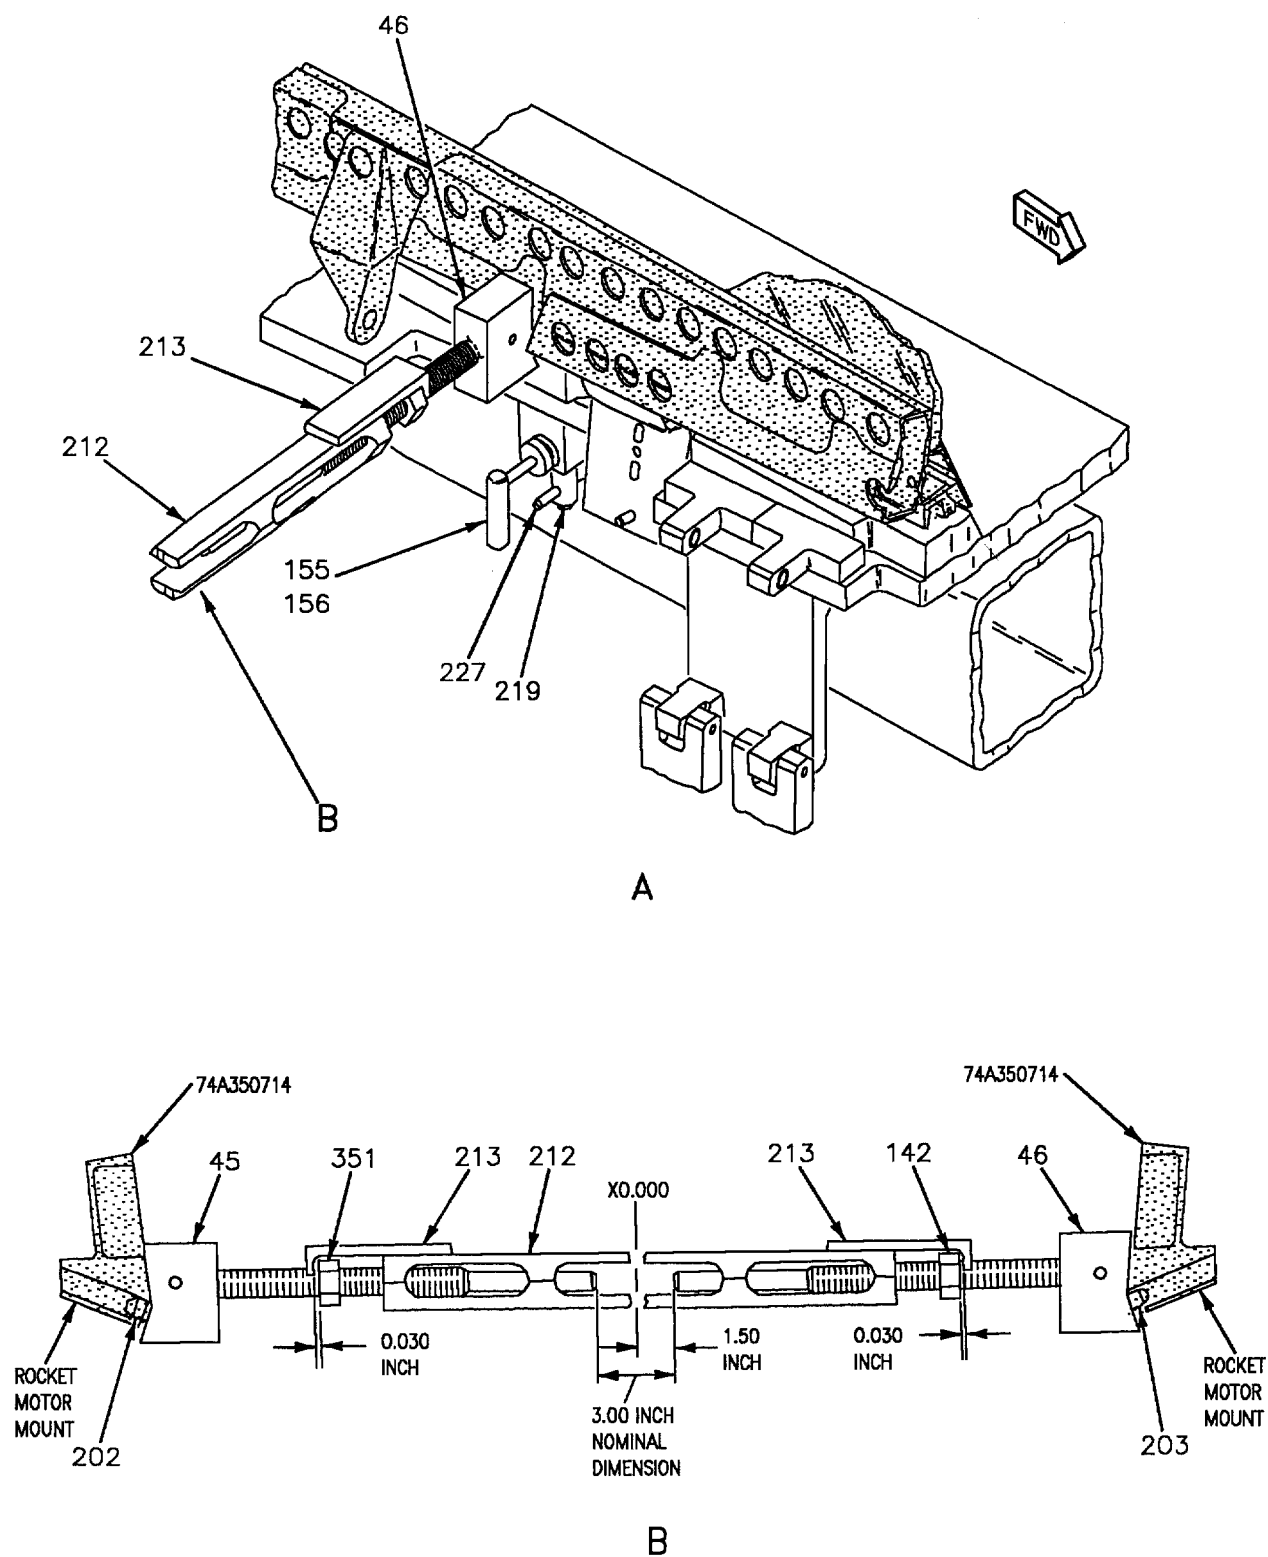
Inspection or Replacement - Side Fairing (Sheet 2)
